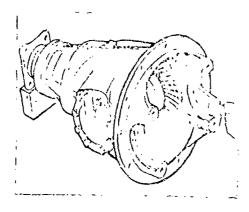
Checking tightness of bearings on driving cylindrical gear shaft
